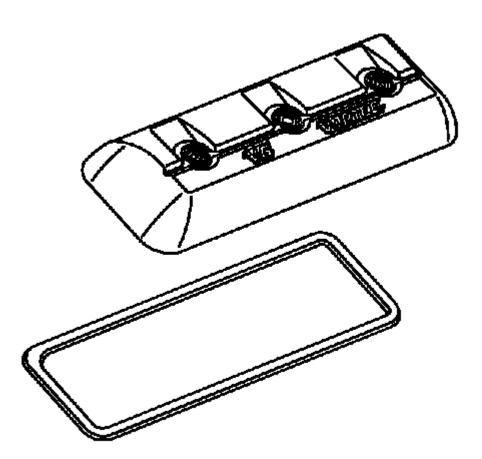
View Of Rocker Arm Cover And Gasket Courtesy of GENERAL MOTORS CORP.
